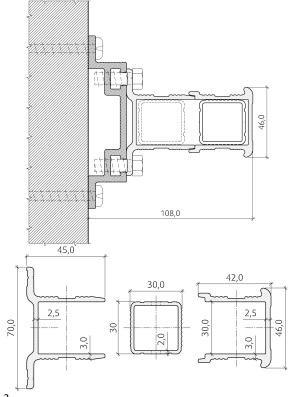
Cross-section of folded ladder and profiles for inner stringer, stair and outer stringer.
